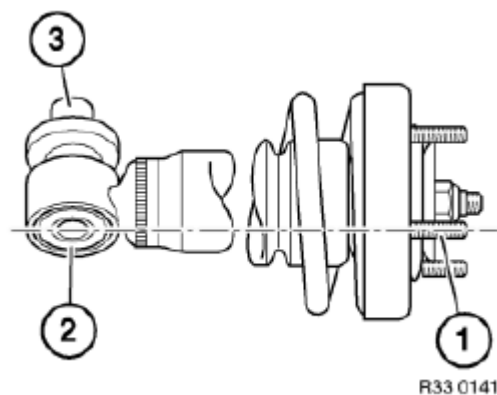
Identifying Threaded Pin, Rubber Mount And Bush
